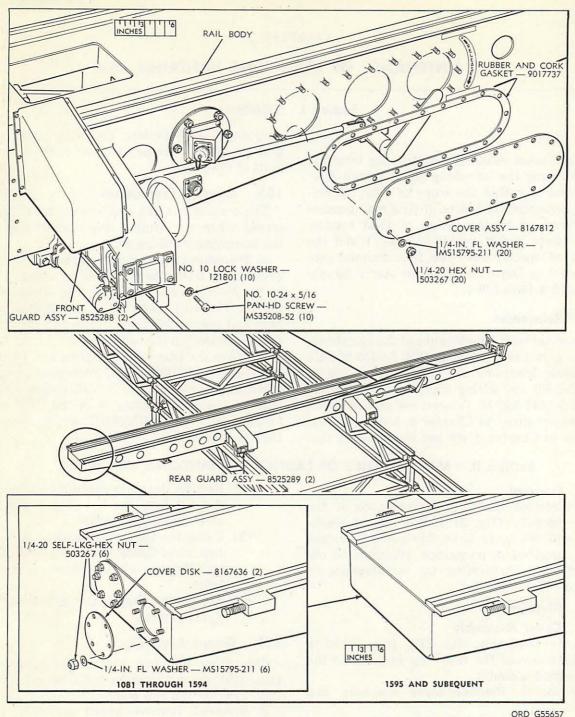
Guard assembly, cover disk, and cover assembly—removal and installation.
